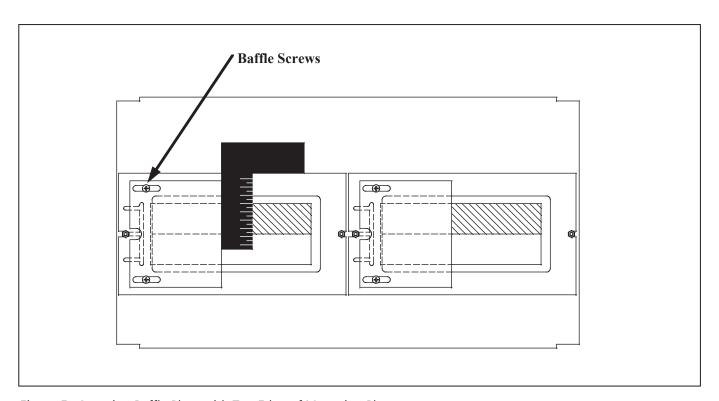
Squaring Baffle Plate with Top Edge of Mounting Plate
